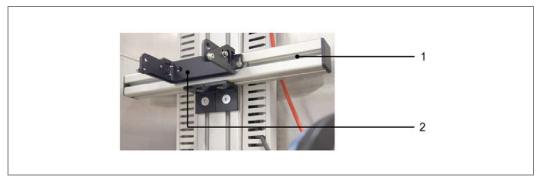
Installing the mounting kit for the LMS1xx laser scanner to the crossbar
